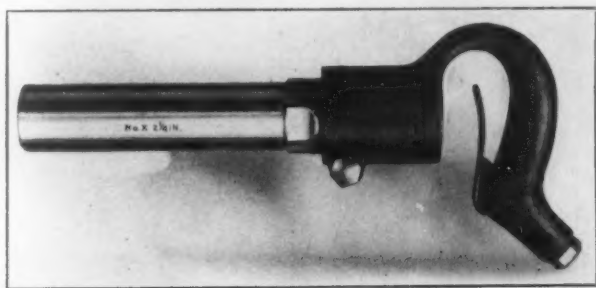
A Steel Casting Chipping Hammer Made by the Cleveland Pneumatic Tool Company, Cleveland, Ohio.
